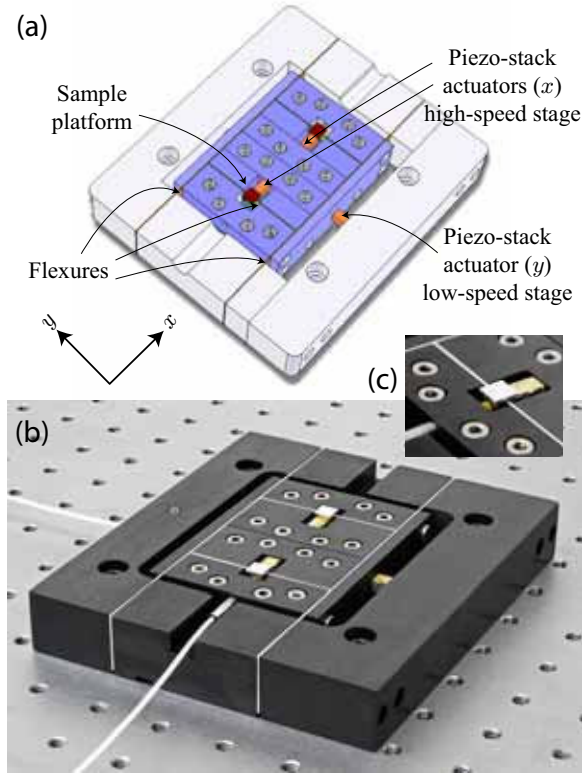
(a) An assembly drawing of the two-axis high-speed scanner, where the high-speed stage ( $x$ ) is nested inside of the low-speed stage ( $y$ ). (b) A photograph of a manufactured scanner with black surface finish. (c) A close-up view of sample platform and  $x$ -axis piezo-stack actuator.
